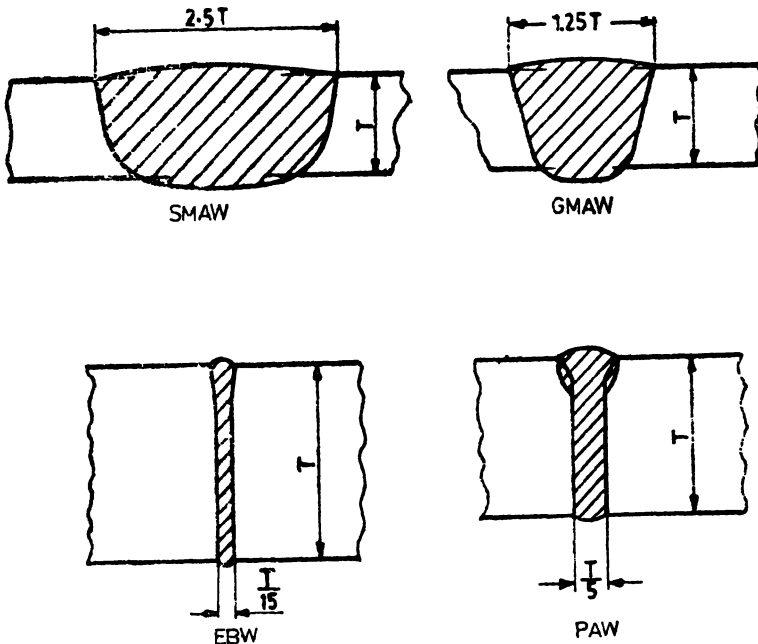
Weld shapes-penetration characteristics.
